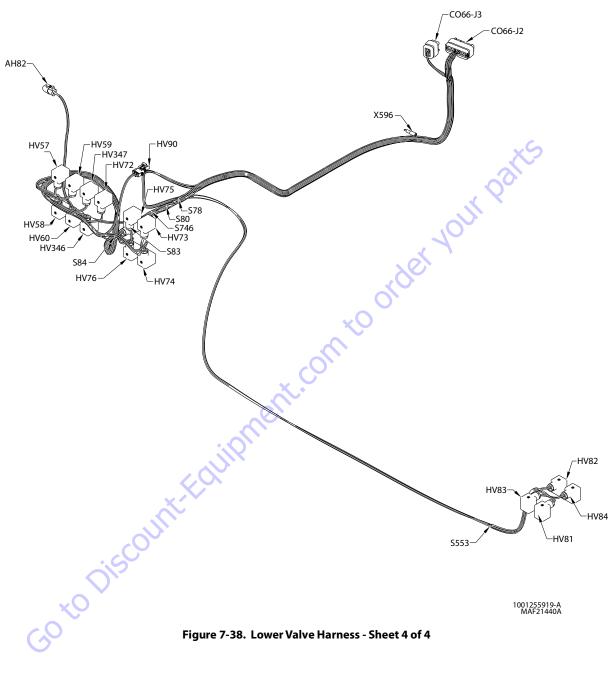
Lower Valve Harness - Sheet 4 of 4
